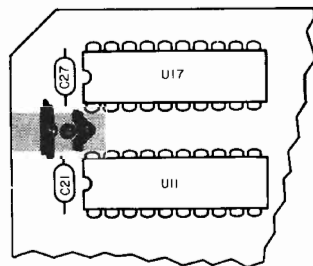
Interface PC Board Assembly (0000-5110-800-J2)
